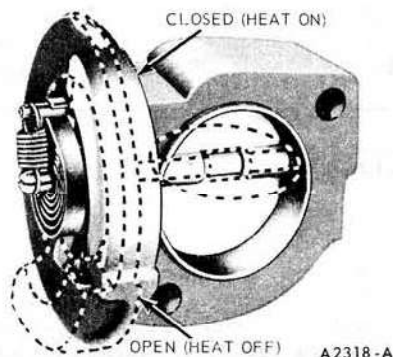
390 and 427 V-8 Engine Exhaust Control Valve
